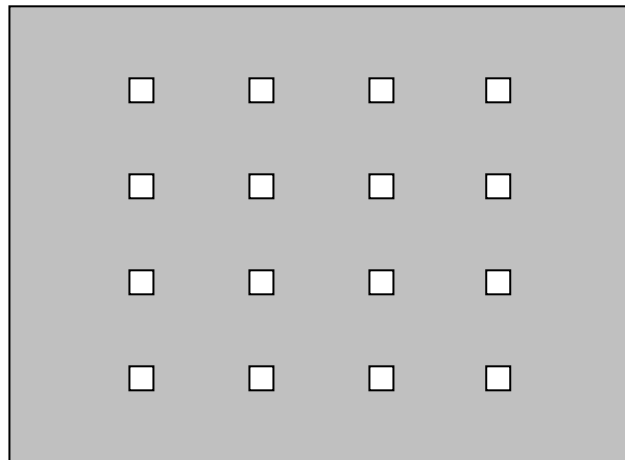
A screen printing mask (the dimension of the openings is c.a.  $2 \times 2 \text{ mm}^2$ )
